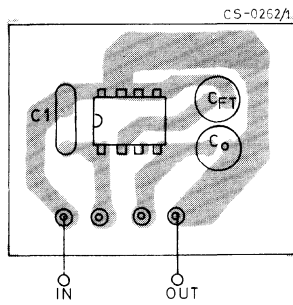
P.C. board and component layout of fig. 1 (1 : 1 scale)
